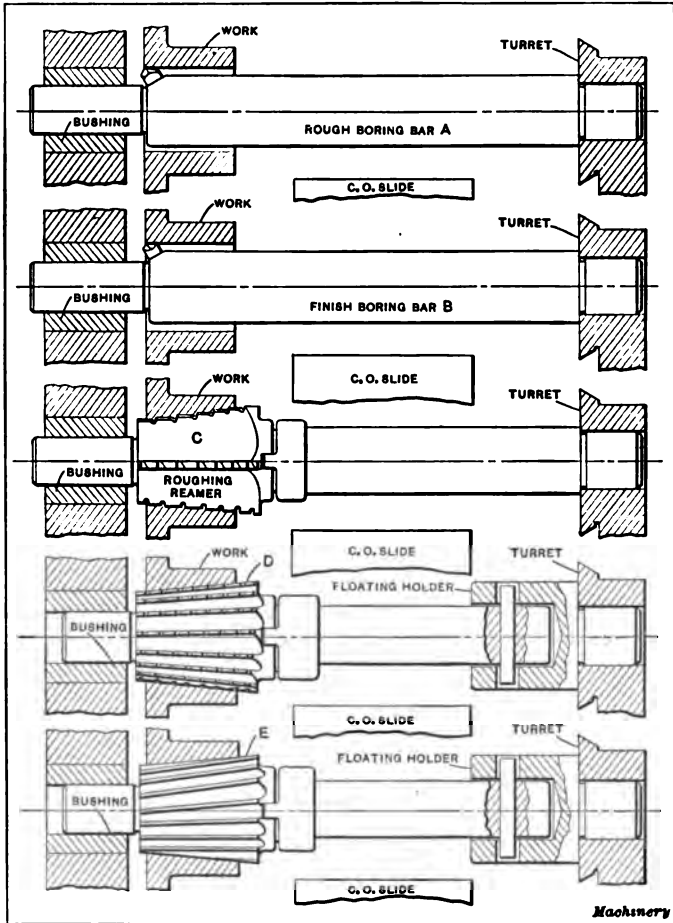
Typical Boring Tools and Reamers for Taper Holes
